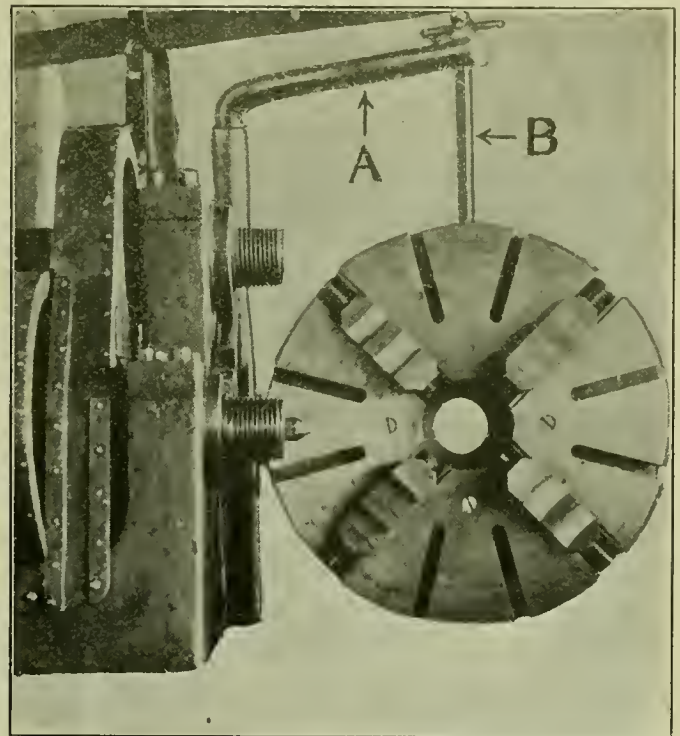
Swinging Arm Facilitates Removal of Chuck from Lathe Spindle
